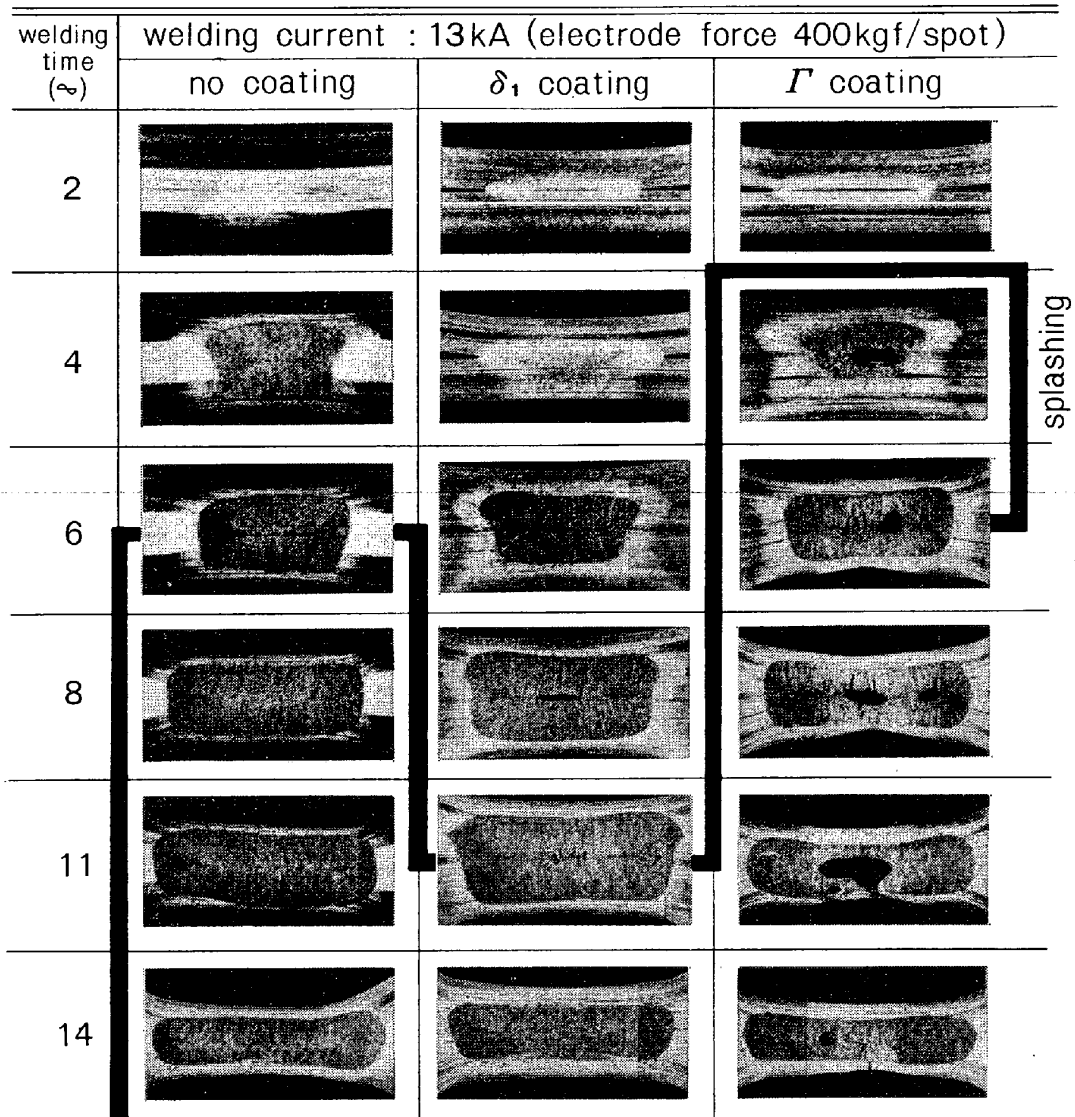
Macro photographs of the spot welds which show growing steps of nugget and cavity in the specimens; (1) no coating, (2)  $\delta_1$  coating, and (3)  $\Gamma$  coating.
